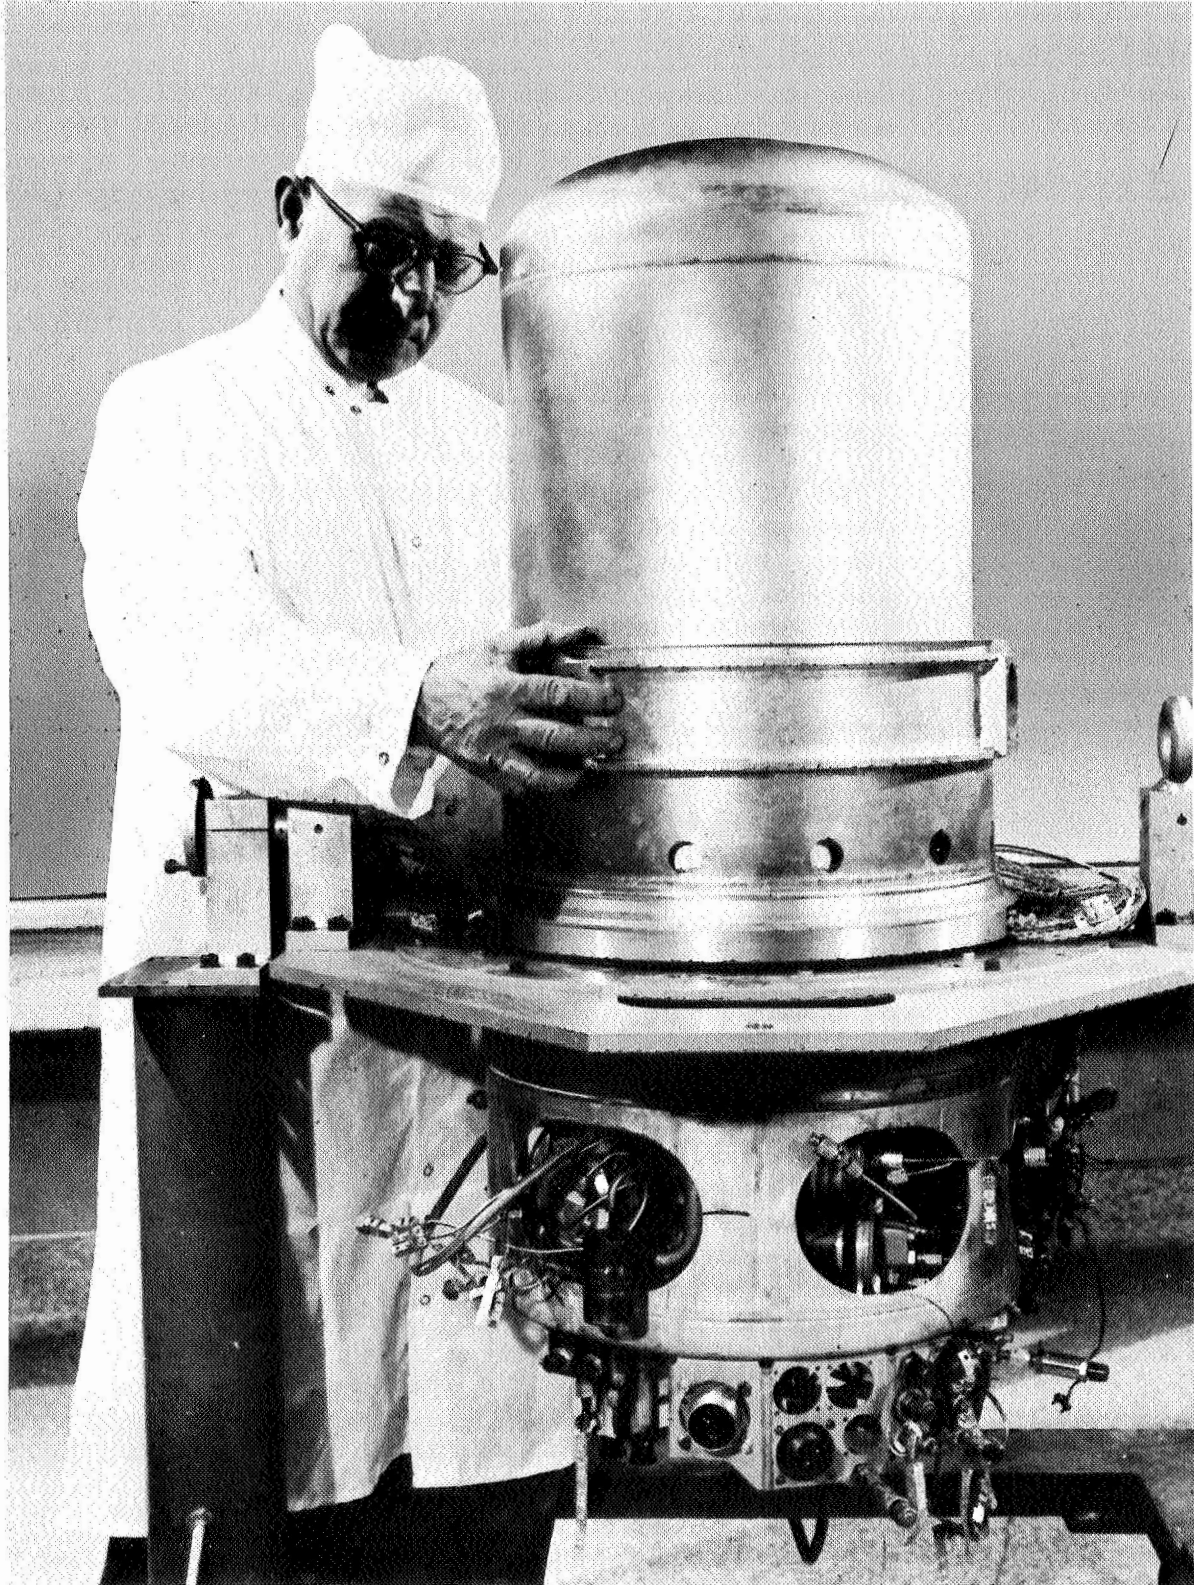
The fuel cell unit for the Apollo spacecraft is being assembled by a technician.
